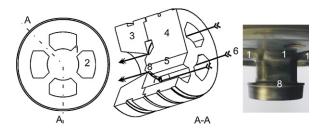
Left: front view of a porthole die with legs (1) and feeding chambers (2). Middle: cross-sectional view where the aluminum (6) flows around the core (5) via the welding chamber (7) to the bearing area (8). Right: detailed view of the bearing area (8) and the core (5) on the mandrel (4) of a porthole die. (3) Denotes the die plate.
